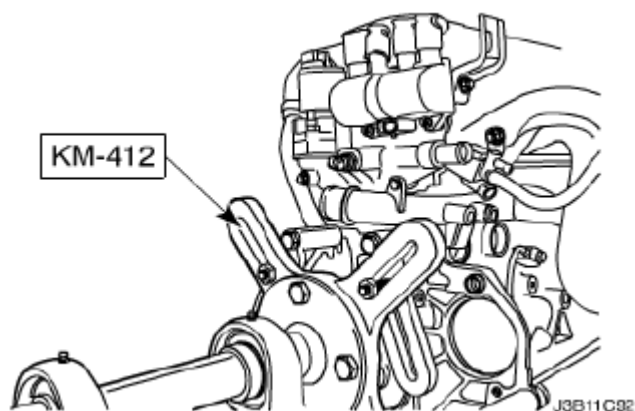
Identifying Engine On Engine Overhaul Stand (KM-412)
